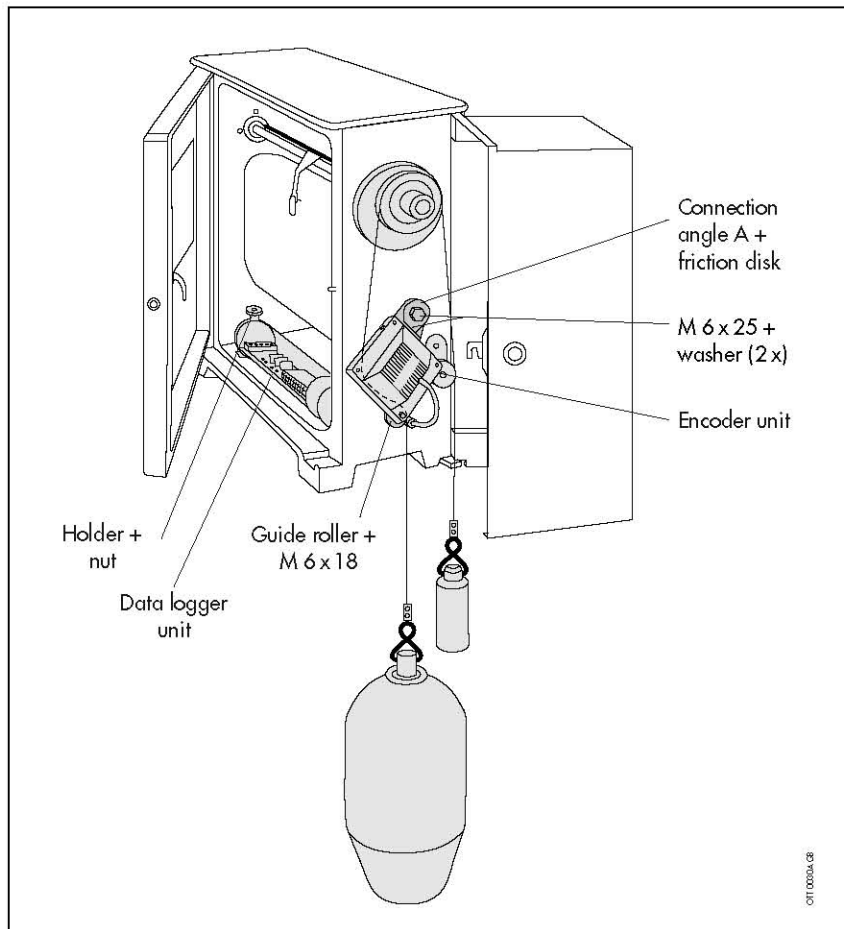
Example of attachment to OTT Horizontal Water Level Recorder Type X
